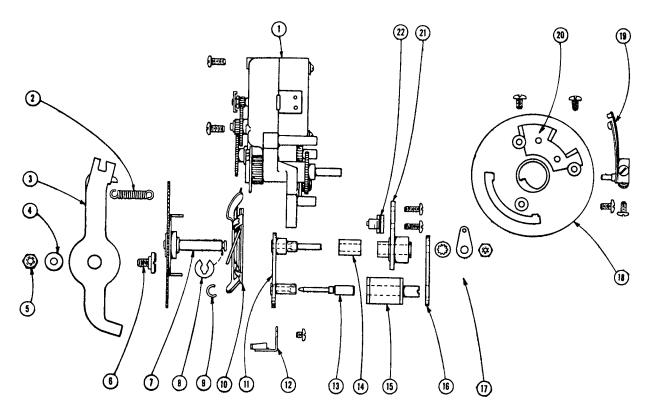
MOTOR, CREDIT & CONTACT ASSEMBLY
